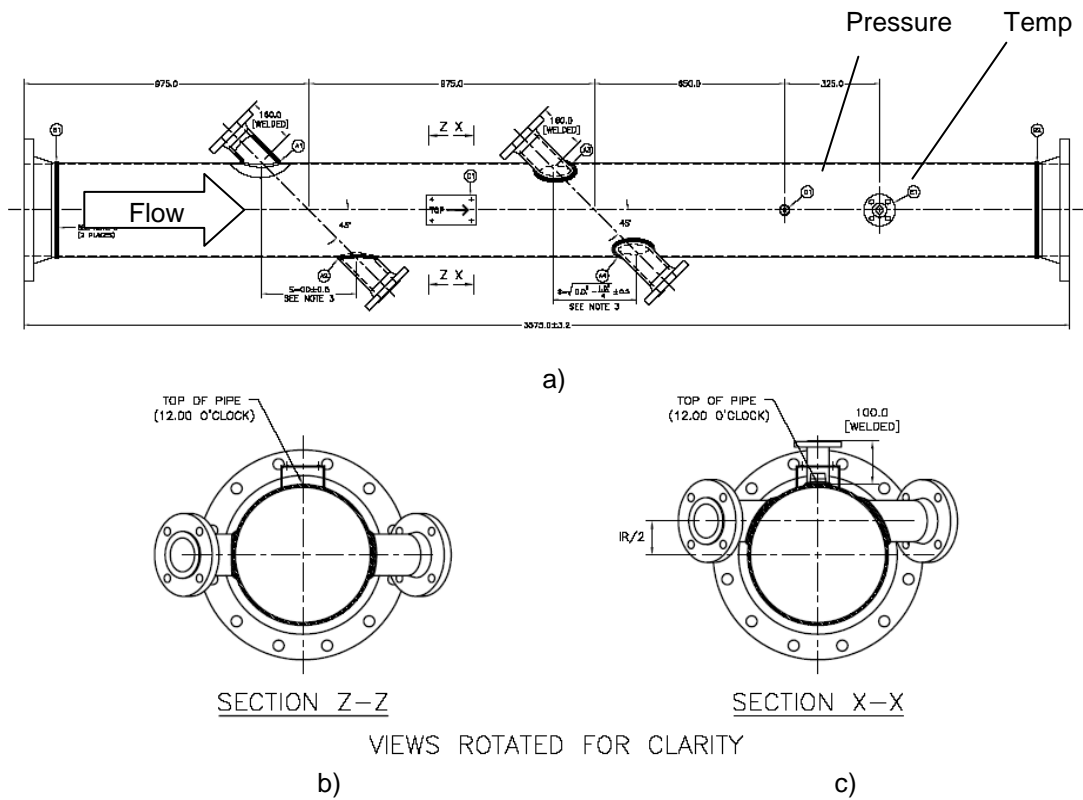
Dimensioned Drawing of the 12" Spool Housing the two Sets of Ultrasonic Transducers: a) Plan View of Spool, b) End View of Diametric Path, c) End View of Mid-Radius Path
